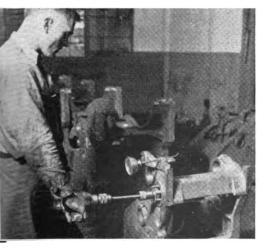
The main bearing holes are finished to size by honing with this Hutto hone.
